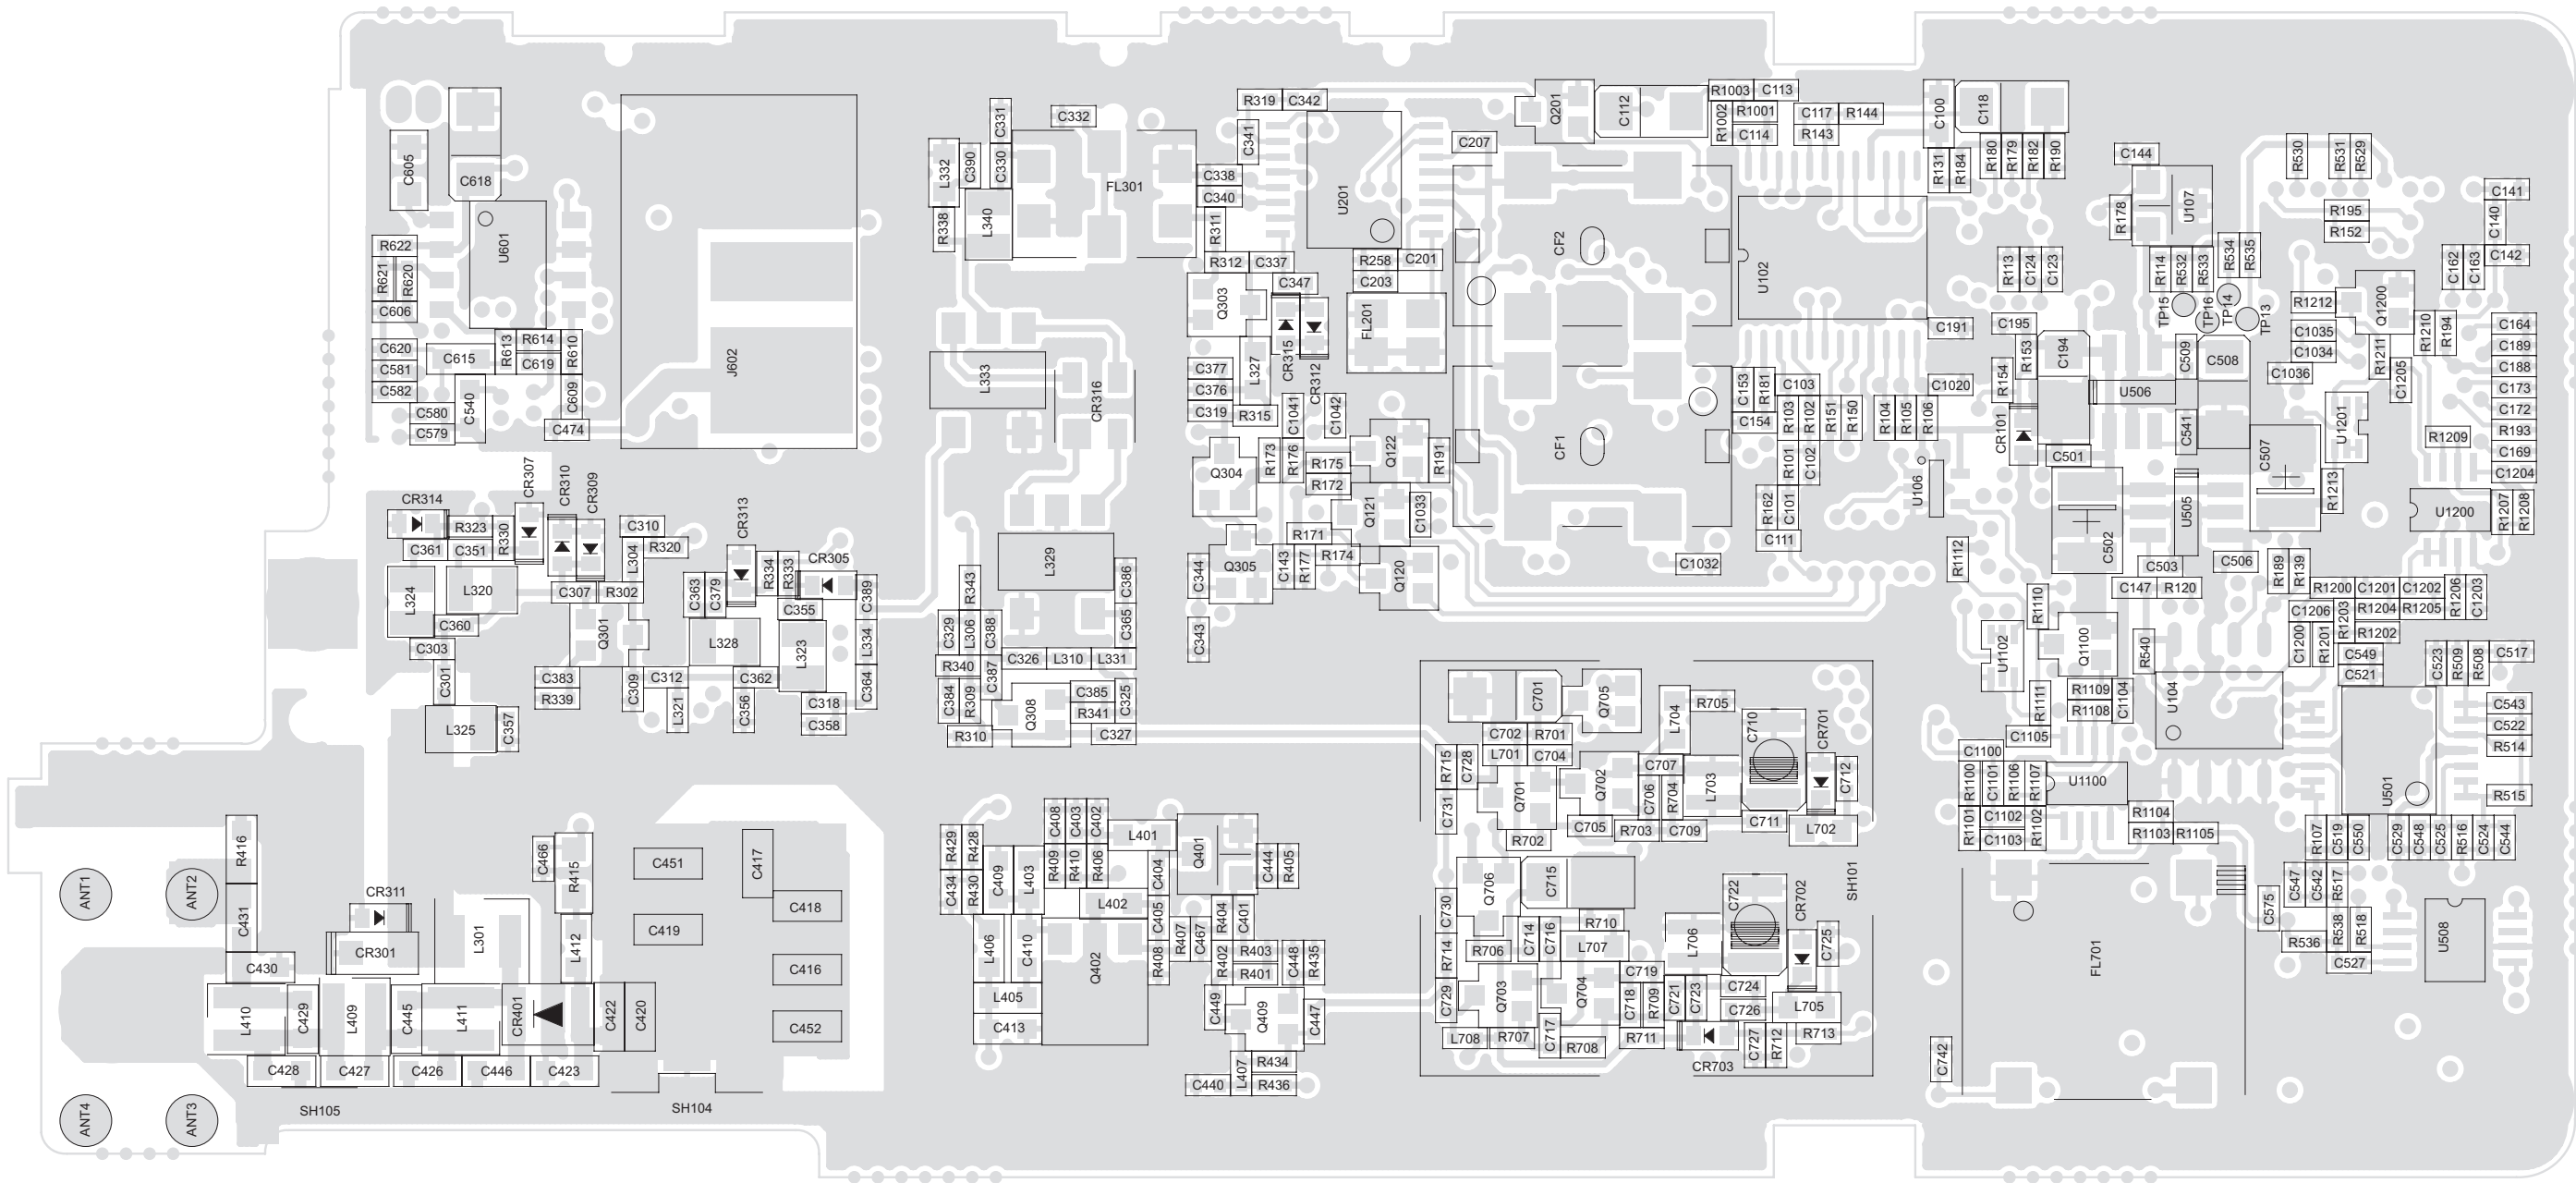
UHF2 MDC/QCII R&TTE (435–470 MHz) Mainboard BottomSide: PCB No. E11-001016-00
